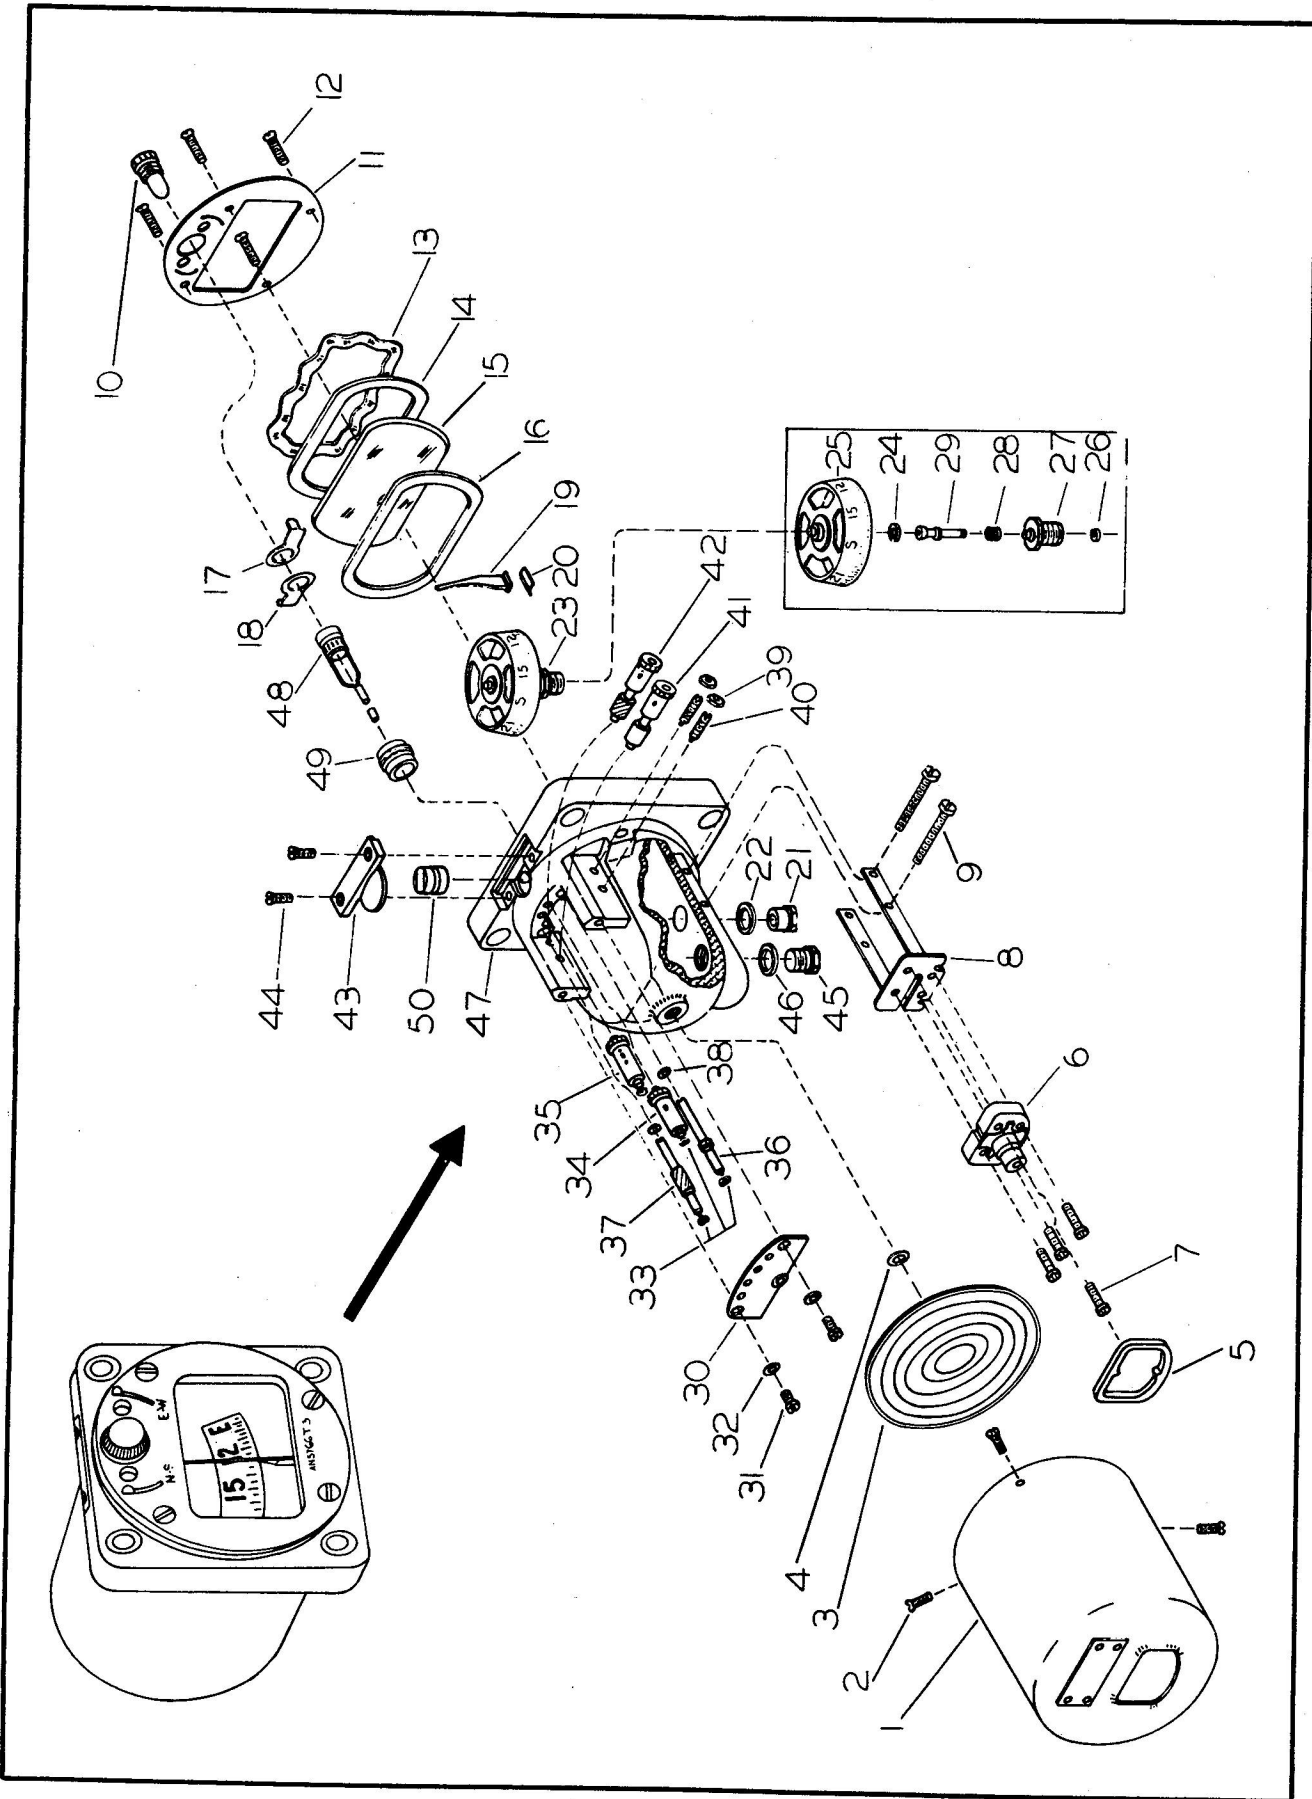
Exploded View - Standby Compass AN5766-T3
